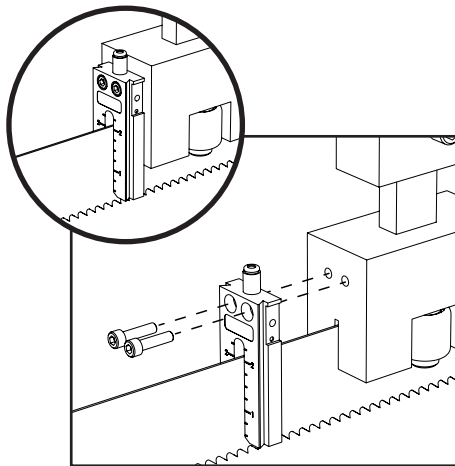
Mounting the Band Saw Blade Nozzle directly to the entry side of the blade guide block (10-32 x 1/2" socket head cap screw) (2 pcs)
